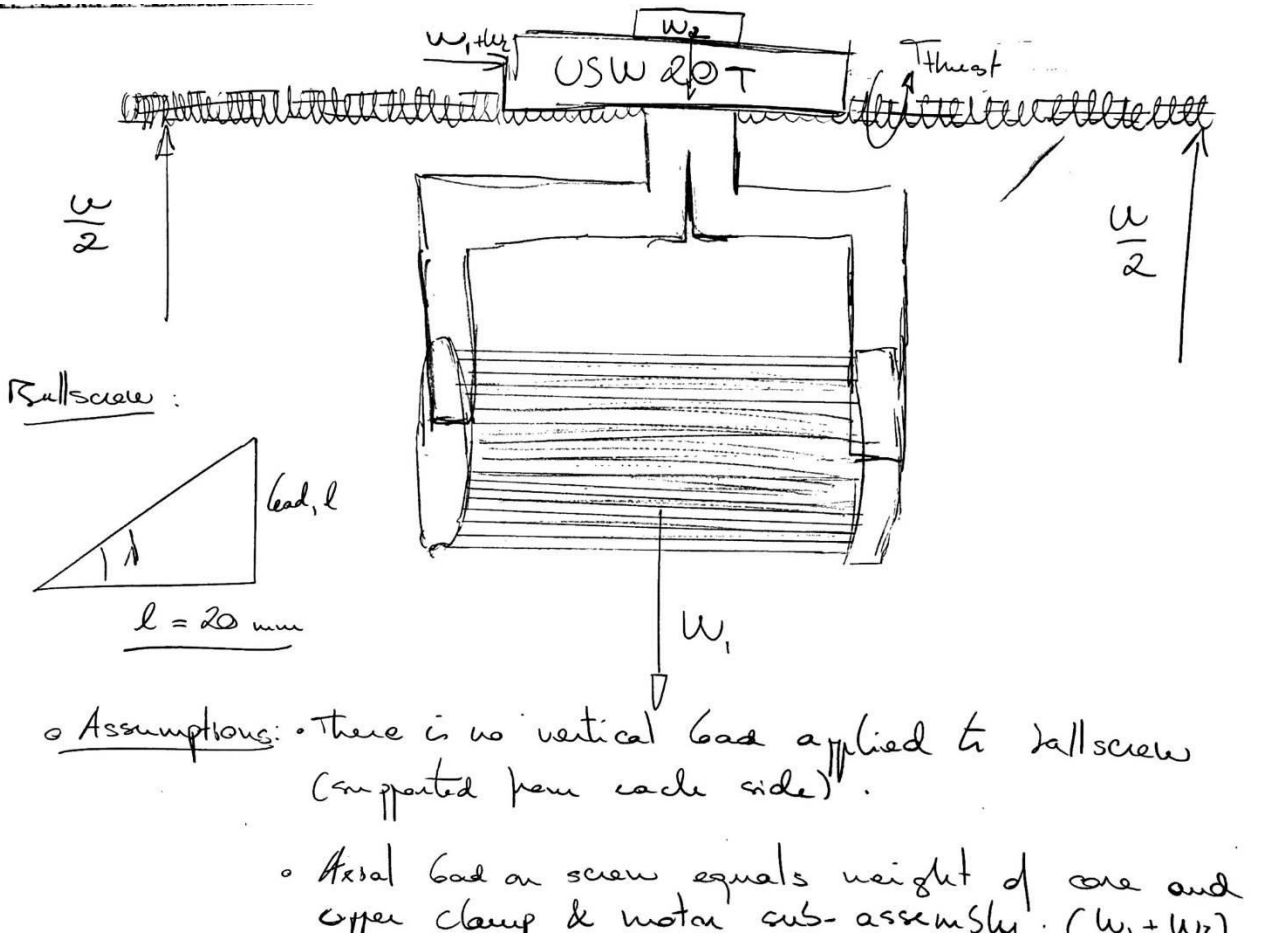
Diagram of fully assembled core supported by horizontal ball screw actuators
